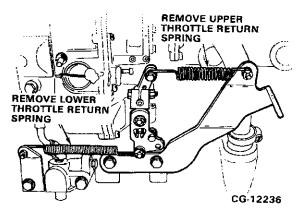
Remove Upper and Lower Throttle Return Springs (Early Production)
